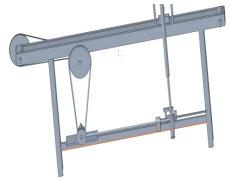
3D Model Design of Conveyor Table, Induction Motor & Paddle System
